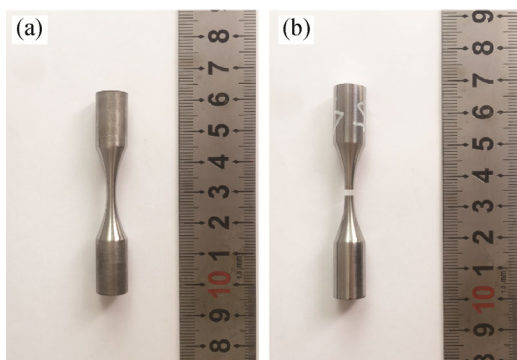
Specimens obtained before (a) and after (b) the fatigue test.
